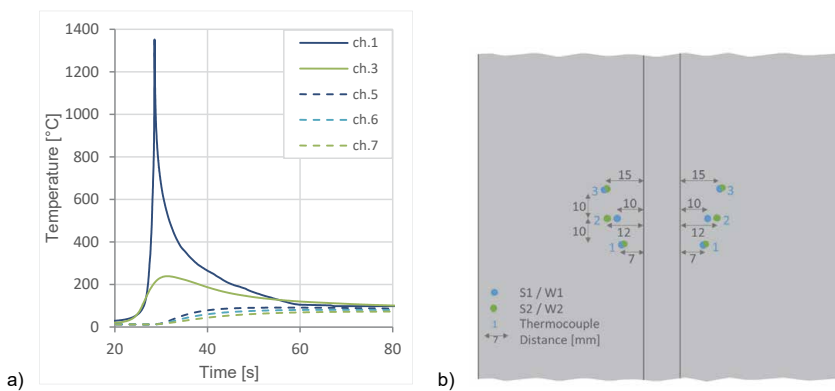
Measured temperature cycles, exemplary a) S1 – weld 1, b) Numbers and positions of thermocouples.
